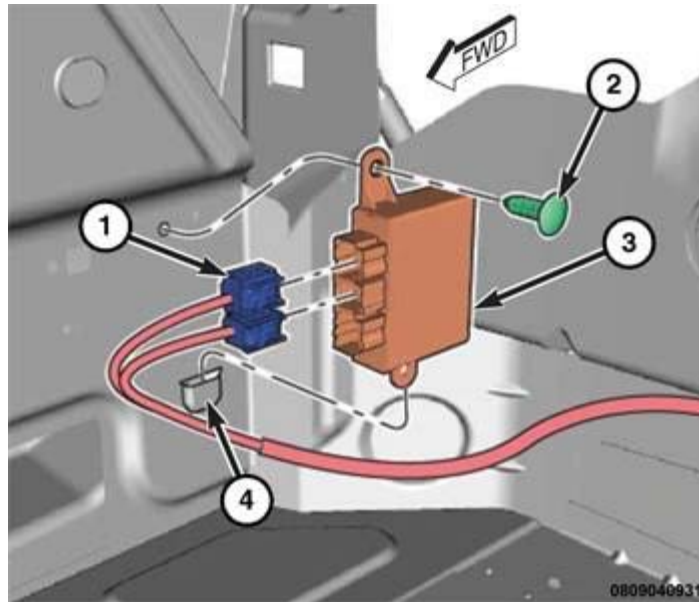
Park Assist Module (PAM), Wire Harness Connectors, Stamped Pocket & Retainer
